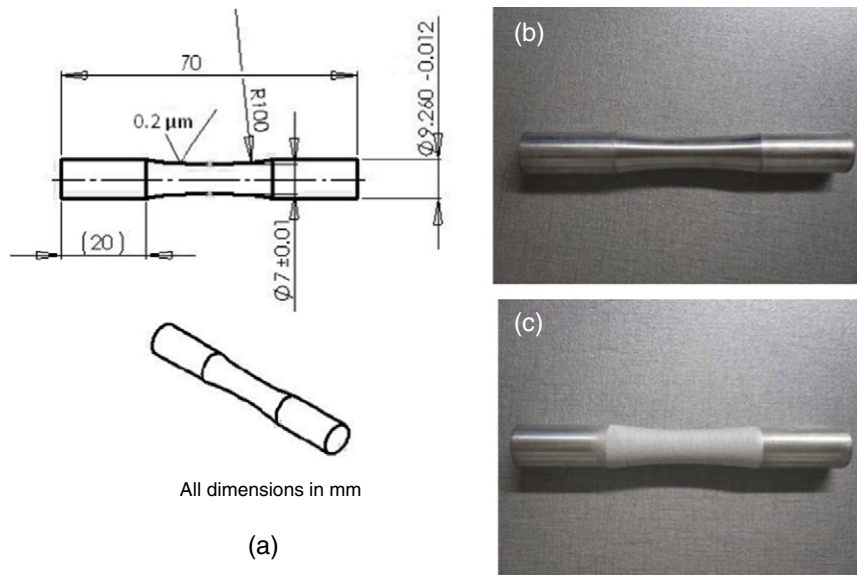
Cylindrical specimens for fatigue testing in air and corrosive environment: (a) sample's dimensions and images of (b) bare and (c) Al cold spray coated specimens.
